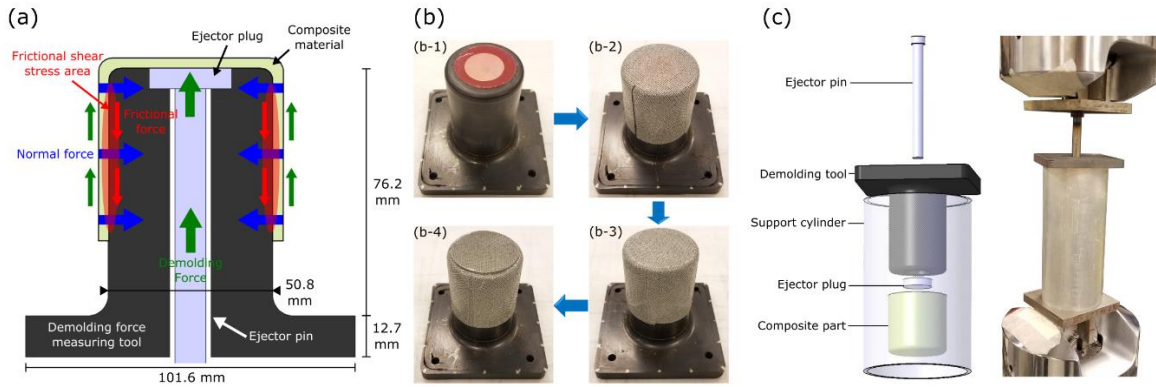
(a) The design of the demolding test tool and schematic drawing of applied forces between the tool and part during the demolding process. (b) Fiber glass reinforced composite prepreg material layup process on the demolding test tool; (b-1) a piece of solid release film on the top of the tool before 1st ply layup, (b-2) after 1st ply layup, (b-3) after 8th ply layup, and (b-4) after additional eight circle plies layup. (c) Schematic drawing of the demolding test setting and the demolding test setting in the MTS system.
